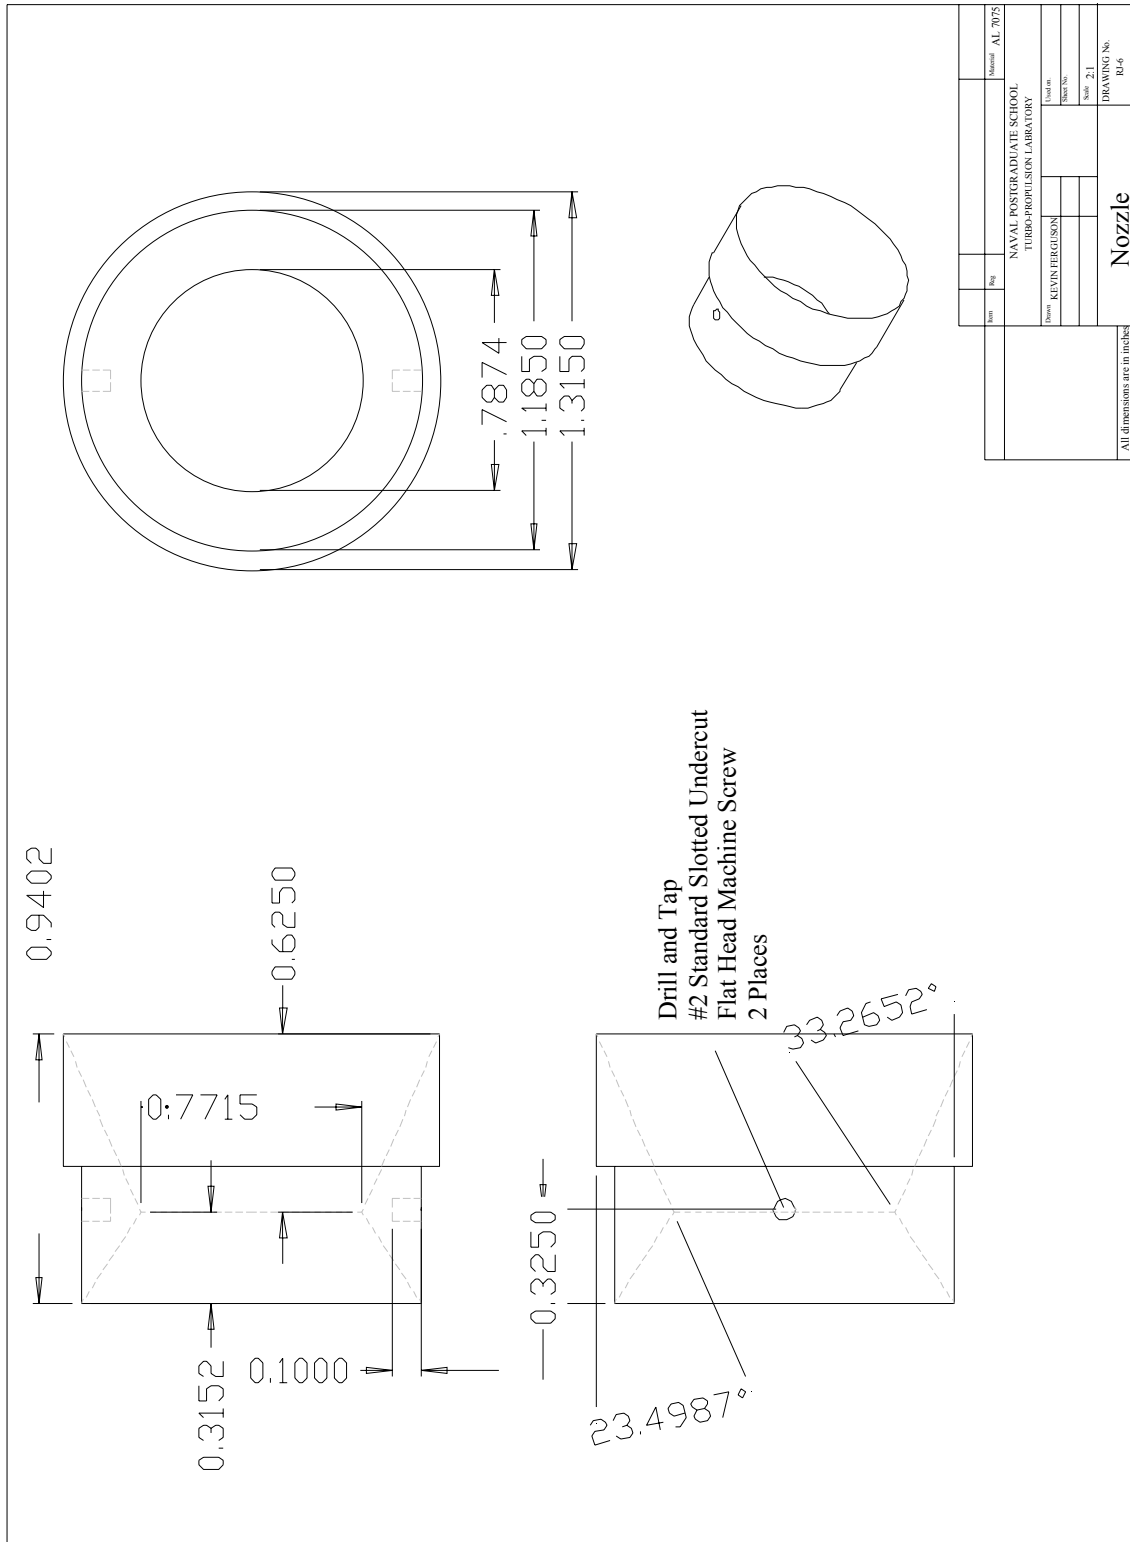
Part drawing: Ramjet nozzle (RJ-6)
